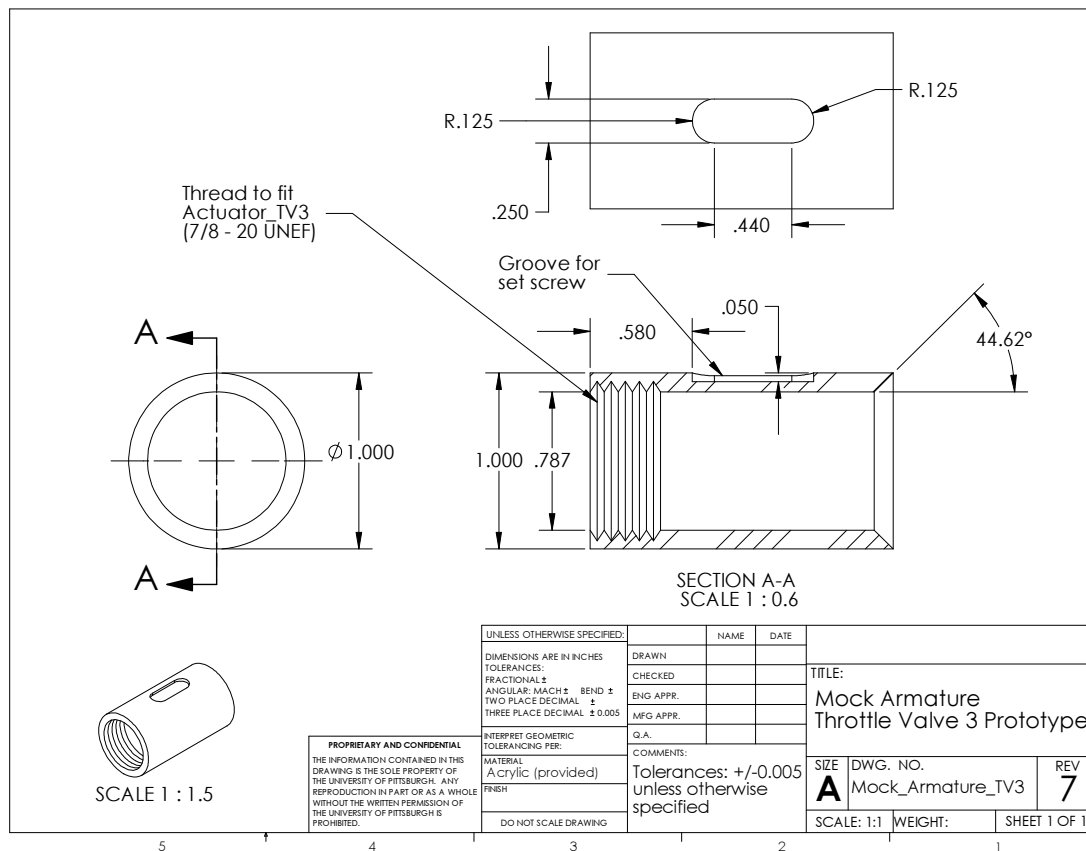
Mock armature component drawing for split-flow plug valve prototype (TV3).
